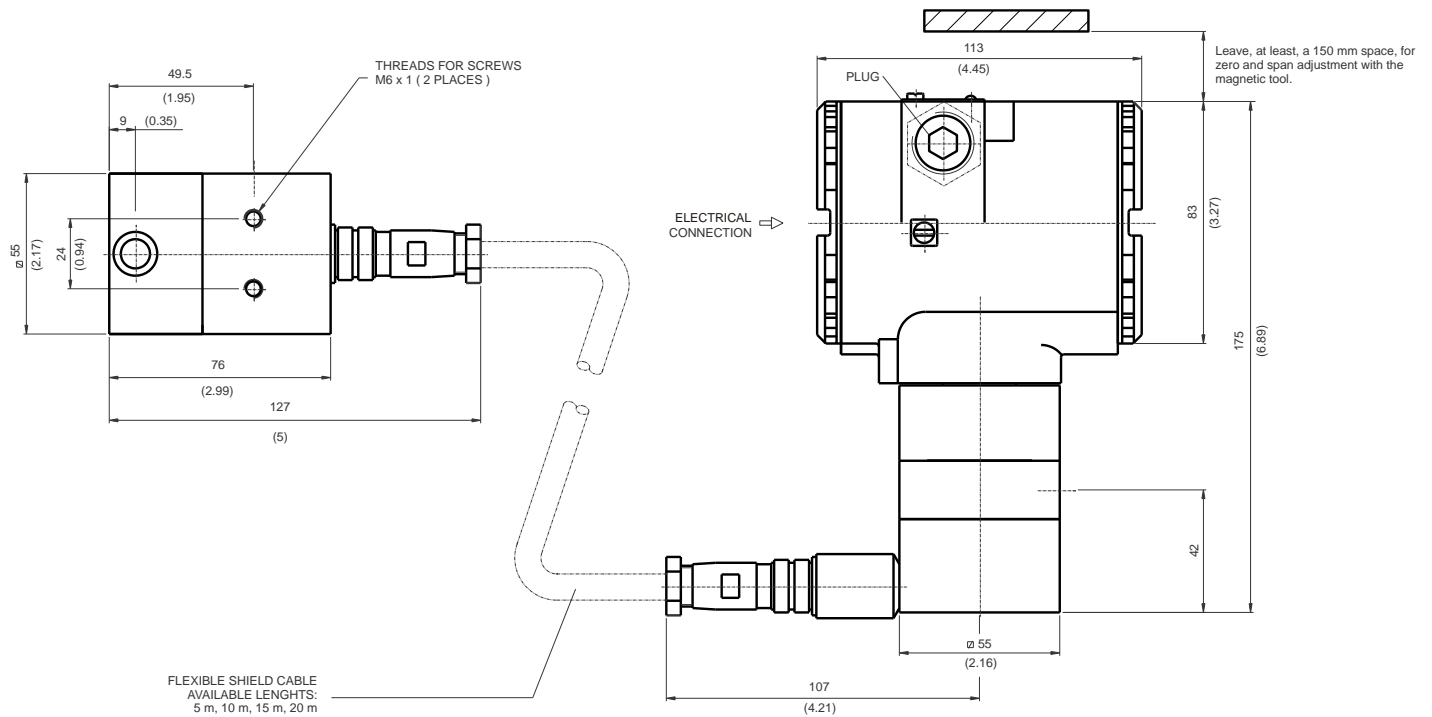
TP302 Dimensional Drawing / Magnets Dimensional Drawing
